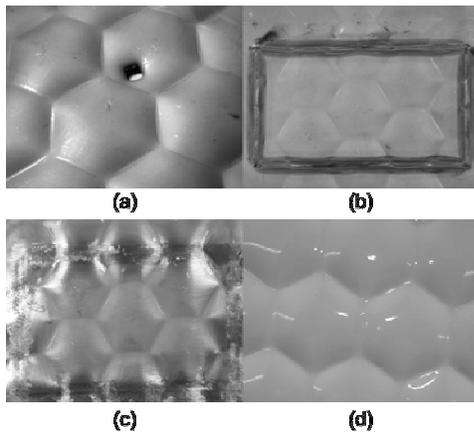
Welding tests using Cold Metal Transfer welding: (a) damaged vault-structured part, (b) substitution part welded in, (c) weldment joint after grinding, (d) repaired area after varnishing
